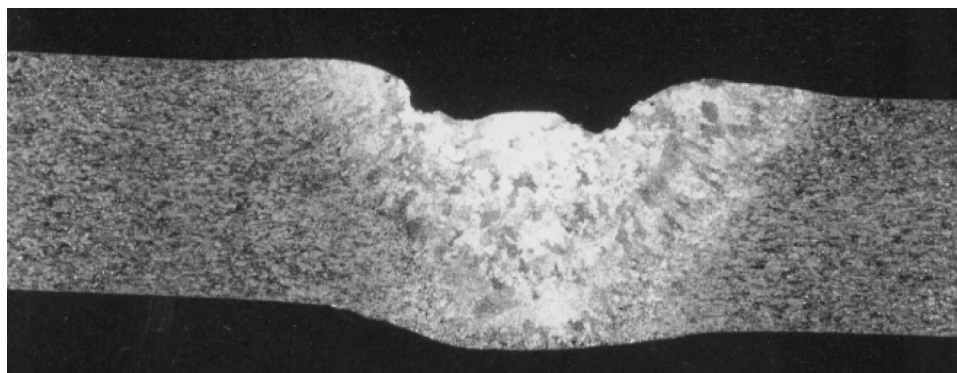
Al 2219 square groove weld (sample 1-6-C-6), $\times 12.5$.
